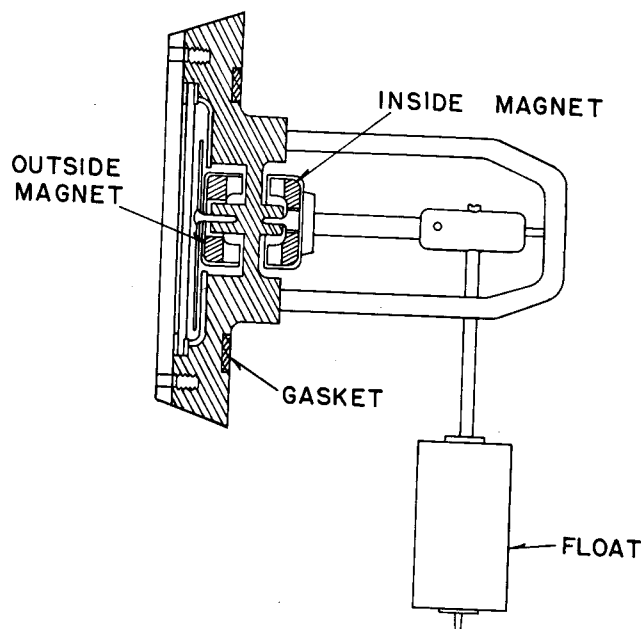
MAGNETIC TYPE FLUID GAGE FOR SMALL SIZE TANK, NEEDLE MOUNTED ON MAGNET
